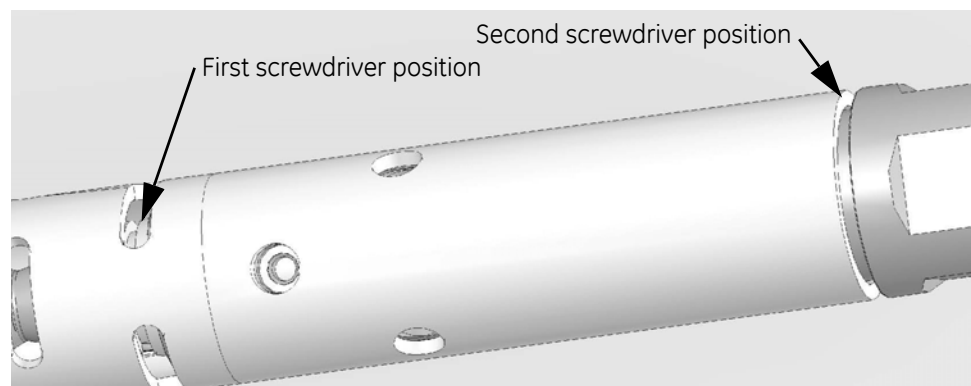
Position of Screwdrivers to Remove the Bottom Sub
